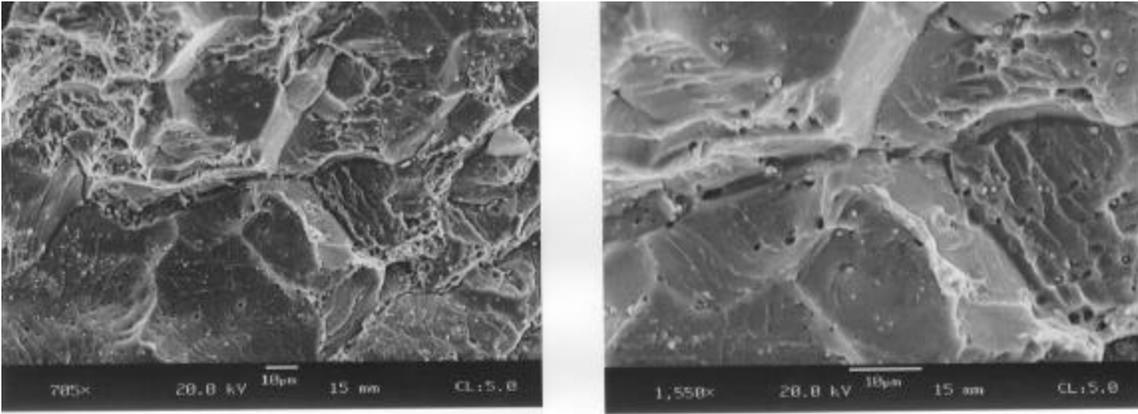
Cleavage Facets Observed on Fracture Surface of Room Temperature Tensile Specimen.
